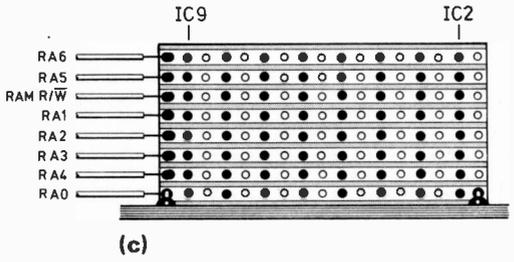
RAM module construction. Four pieces of stiff wire can be soldered to each end of each bottom track, to produce mounting "legs" which can then be soldered to secure the module to the p.c.b.
